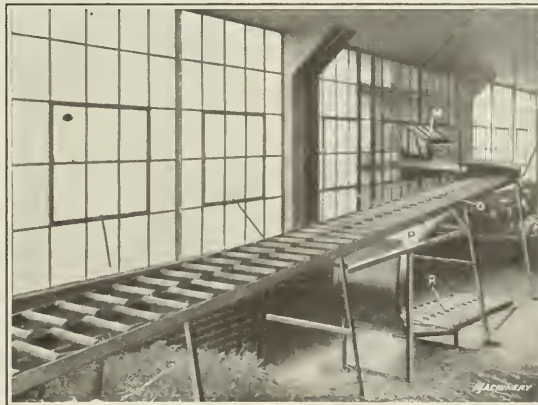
Conveyor for carrying Coils into Shop and delivering them to Machines
